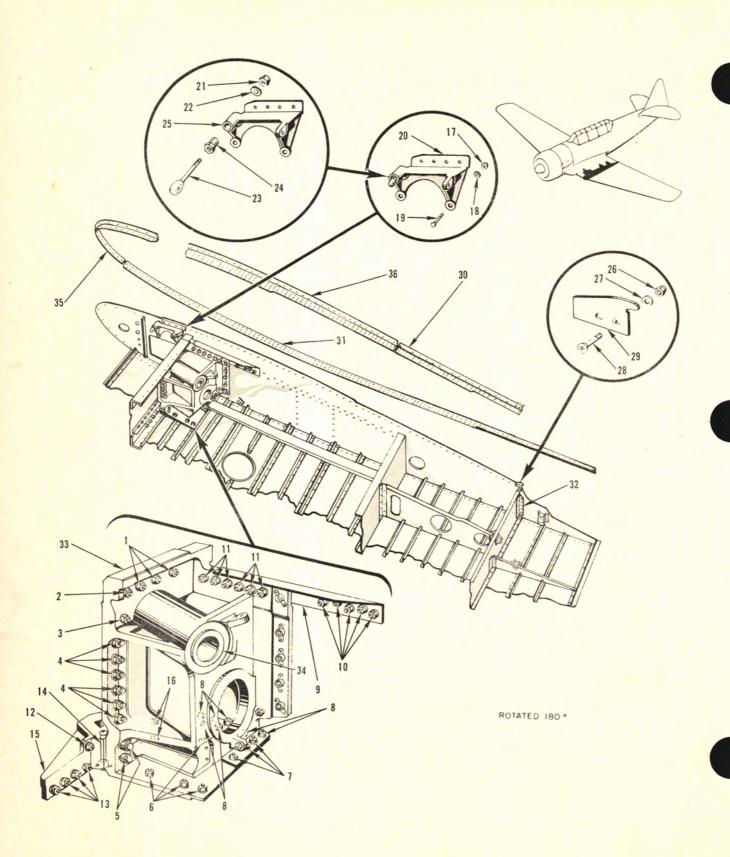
WING CENTER SECTION COVERED ASSEMBLY
